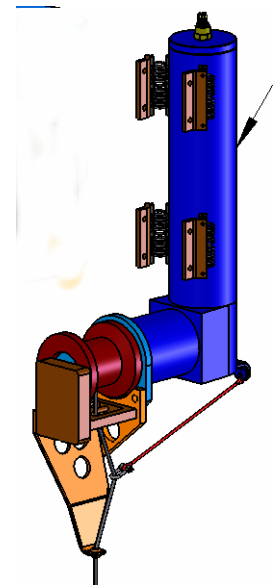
Winch system with dynamic wire tensioning device and shock mounts.
